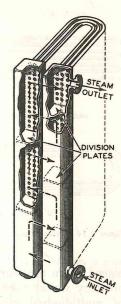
Welded-in division plates on early boiler superheater
